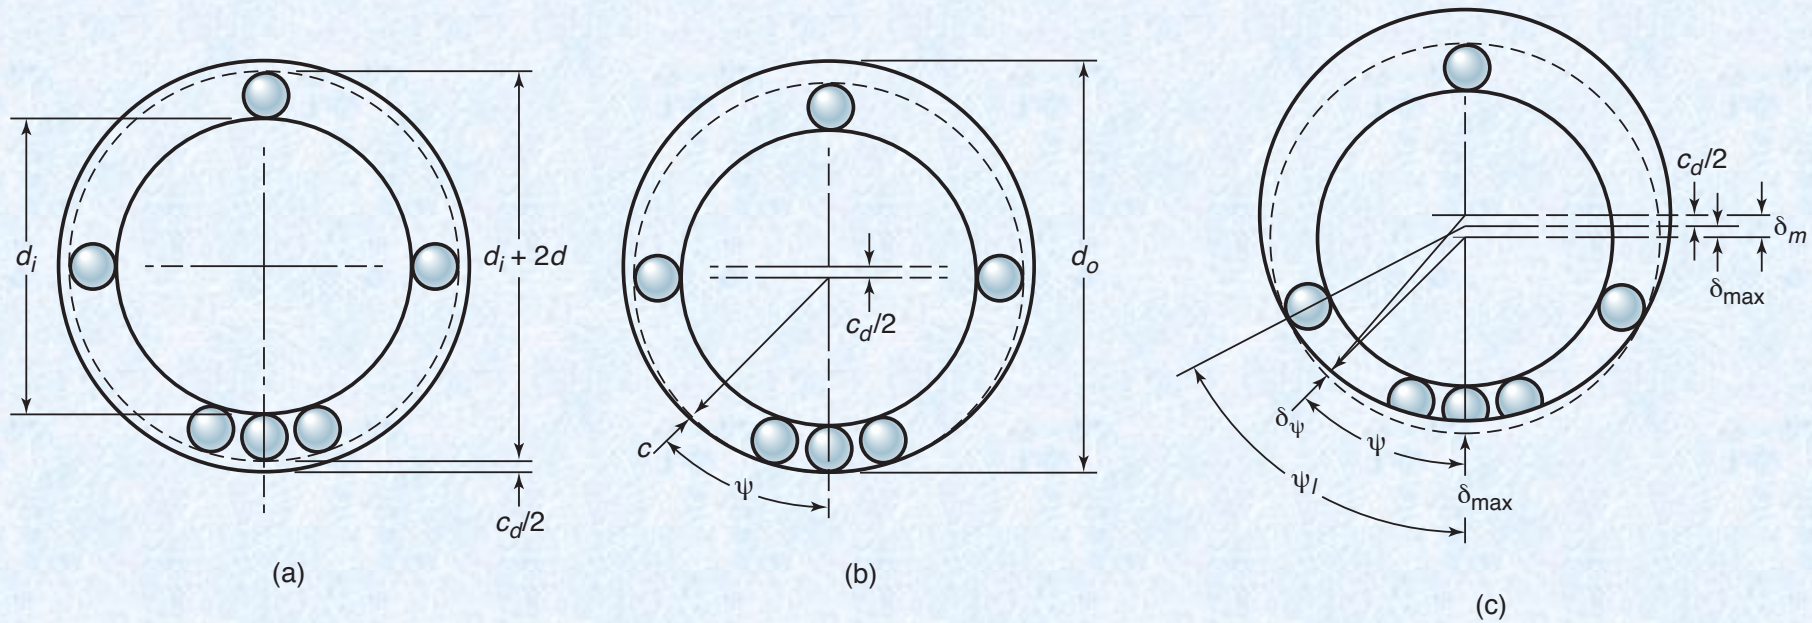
Radially loaded rolling-element bearing. (a) Concentric arrangement; (b) initial contact; (c) interference.
